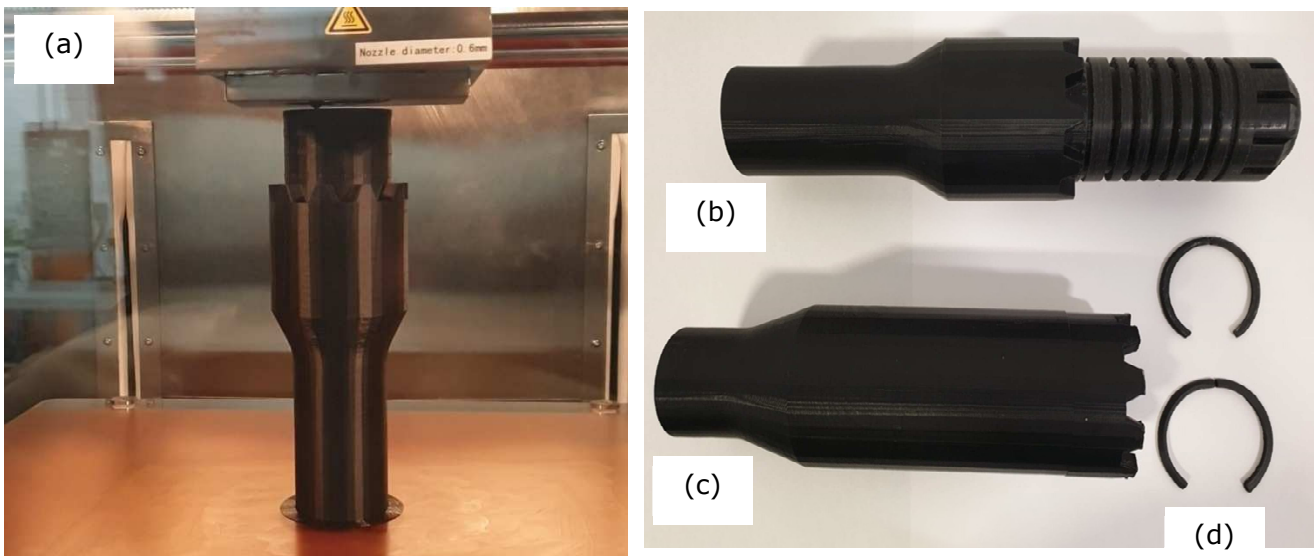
3D printed models of non-threaded tool joint (Acrylonitrile-Butadiene-Styrene): (a) 3D printing of Pin Connector under progress, (b) Pin Connector, (c) Box Connector, and (d) Snap-Latch Rings design.
